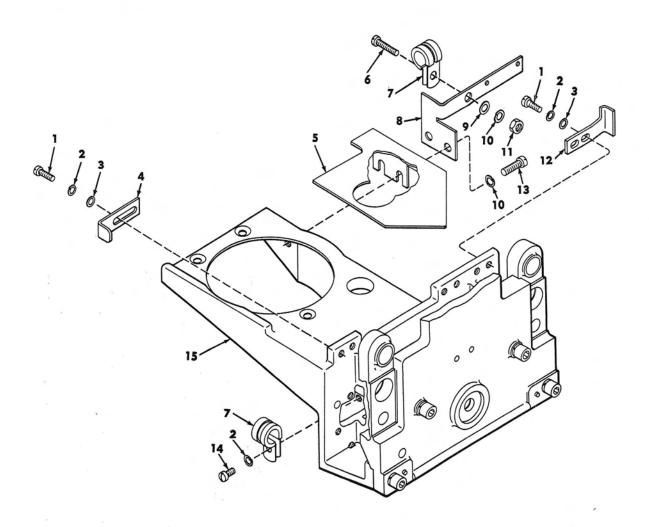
CARRIAGE, PEN /8171889/-PARTIAL EXPLODED VIEW
